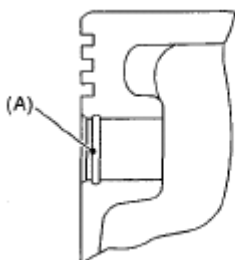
Checking Clearance Between Piston Pin And Hole In Piston
